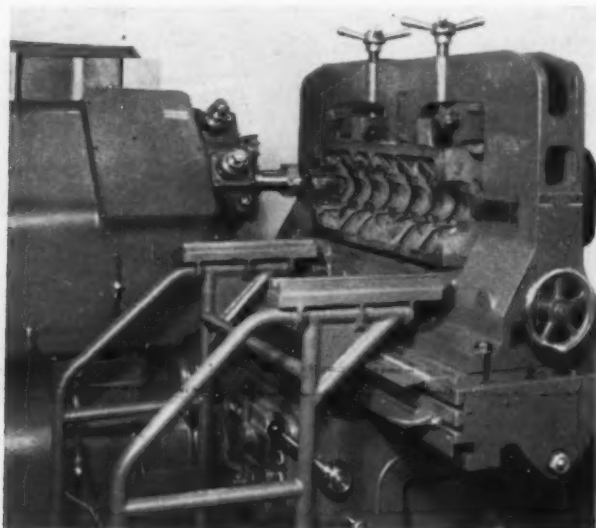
MEDIUM-PRODUCTION SETUP FOR MILLING TOP, BOTTOM, AND BEARING LOCKS ON CYLINDER BLOCK ON DUPLEX MILLING MACHINE
